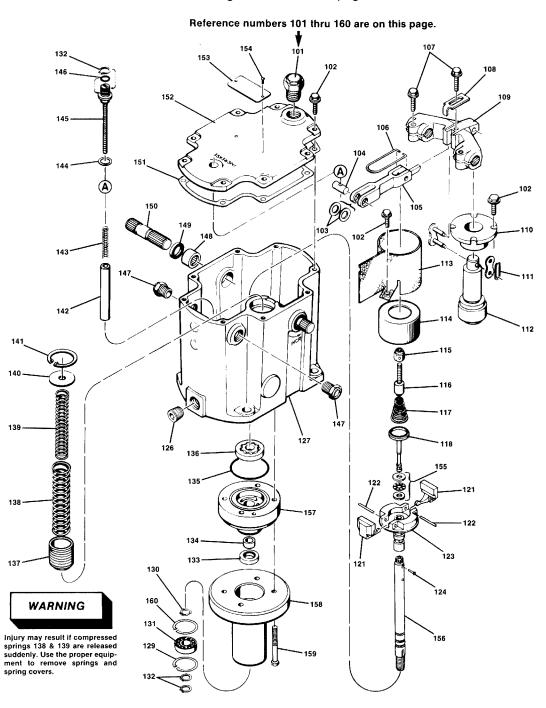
Parts for the TG-13 and -17 Governor with Extended Drive Shaft, Die-cast Aluminum Case, Screw Speed Setting
